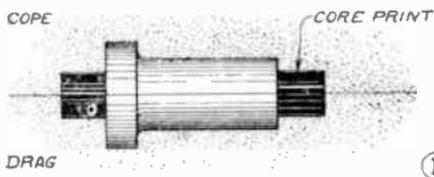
Moulding of parted pattern with horizontal cylindrical core prints, horizontal core.
